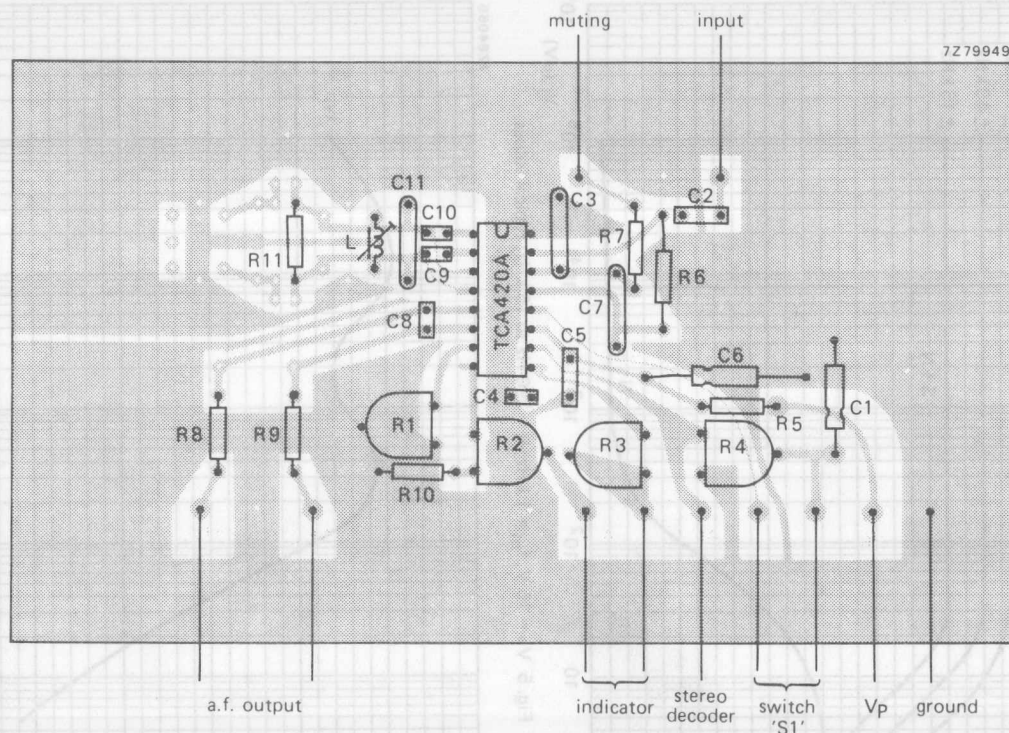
Printed-circuit board component side, showing component layout. For circuit diagram see Fig. 3.
